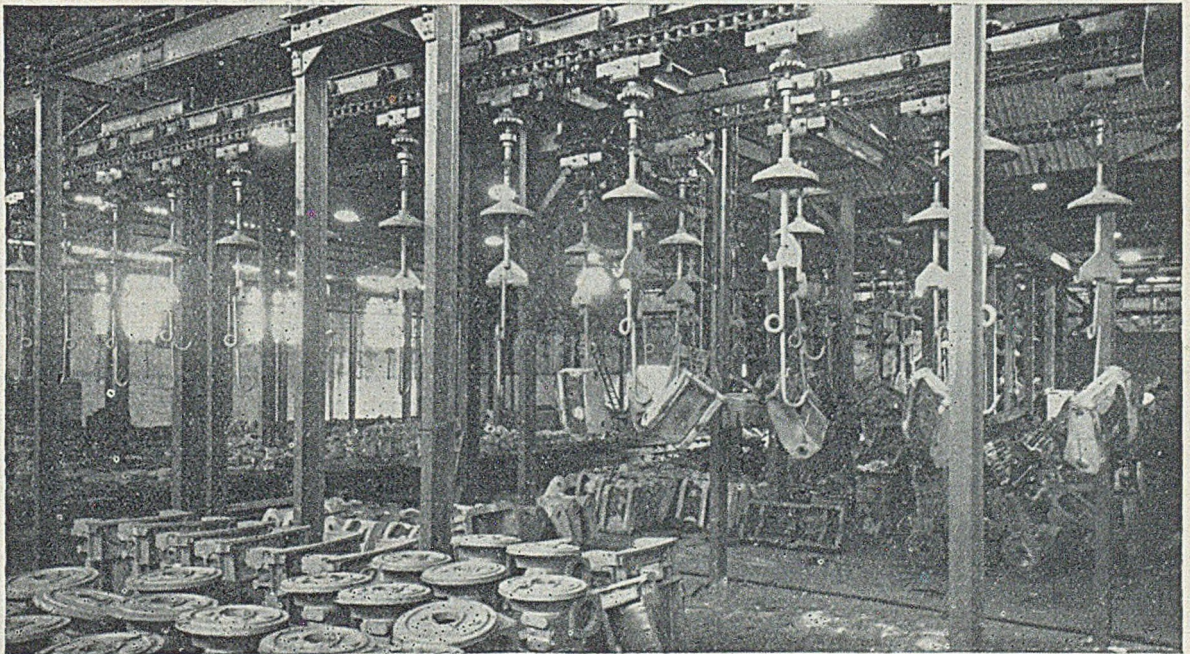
View of Part of the Pendulum Conveyor at Lloyds, taking Cooled Castings continuously through the Wheelabrator Chamber.
